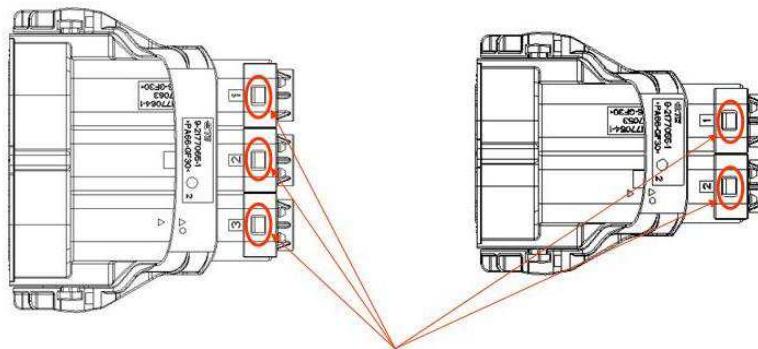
Assembly 2pos. connector/Montage 2-pol. Stecker
